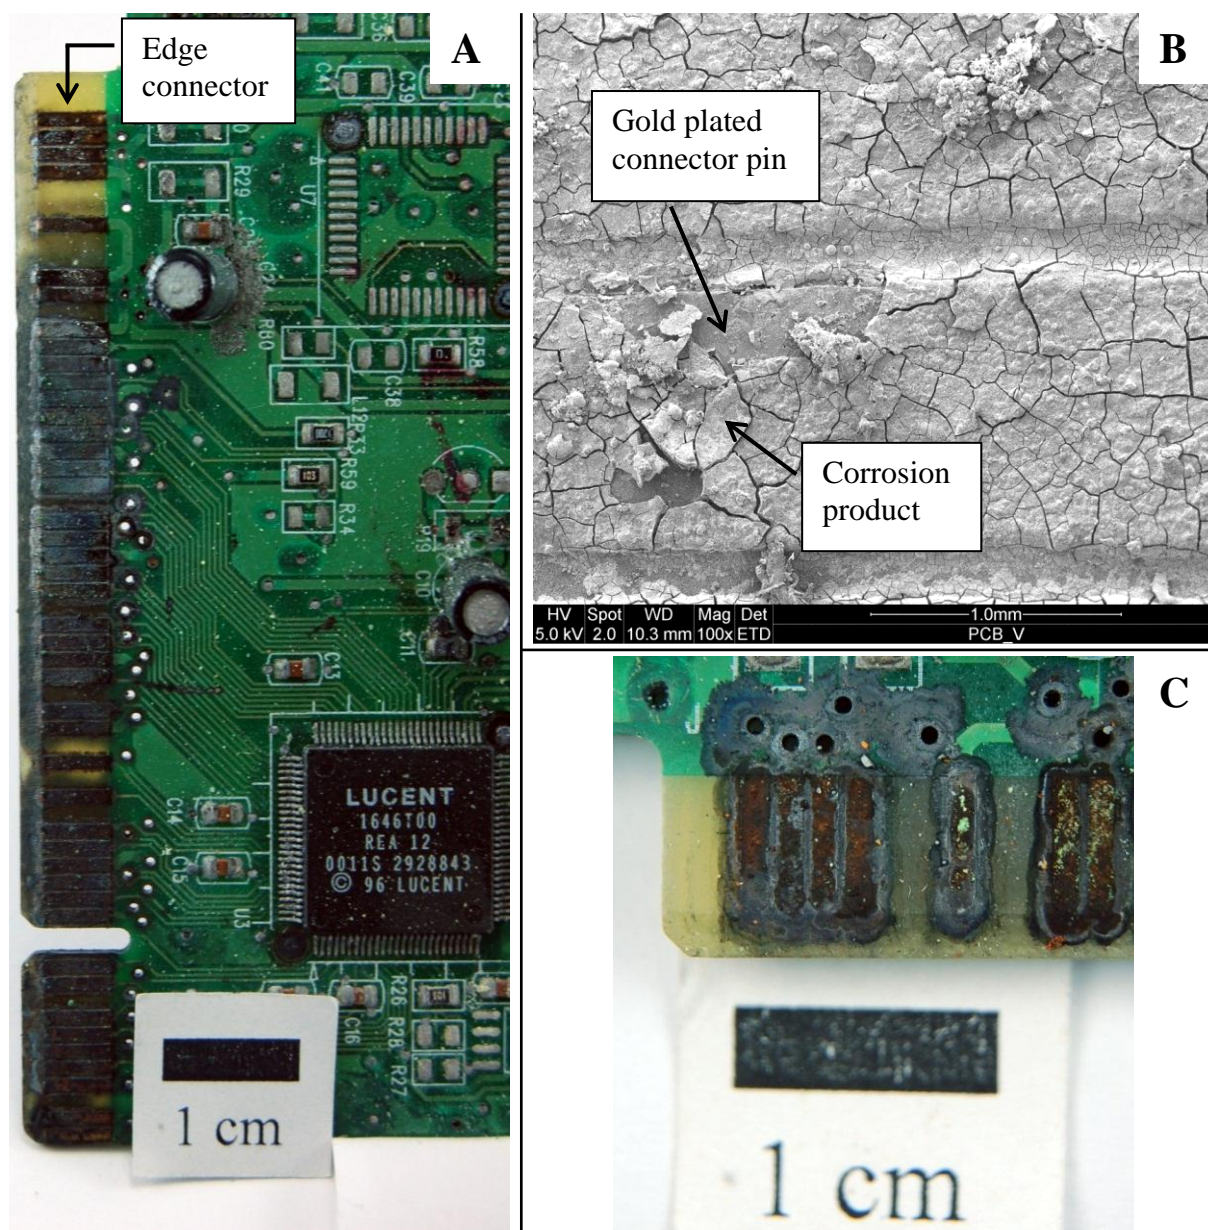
Photographs of an exposed PCB from location 1. (A) photograph showing the corroded edge connector; (B) SEM photograph at 100 times magnification showing the corrosion product forming a layer over the Au plated connector pin; and (C) close up of seven edge connector pins and 'through holes'.
